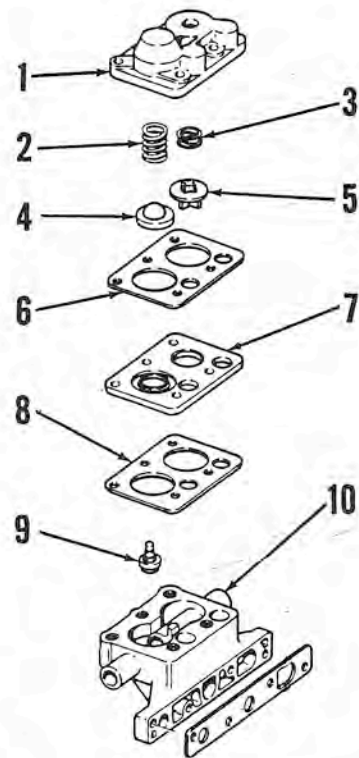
Exploded view of thermostat housing and related parts. Housing (10) mounts at rear of lower unit adapter plate.
